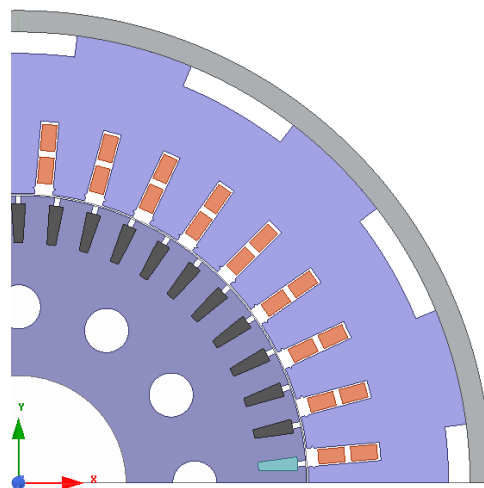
Prototype-002 Stator Cooling Vents and Motor Frame
